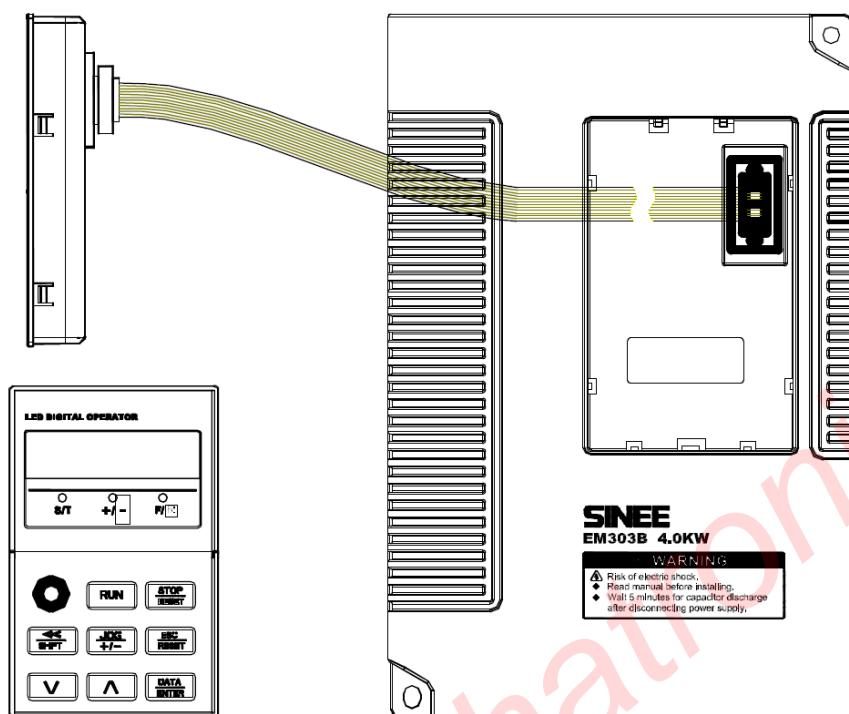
Disassemble the Keypad and Connect Extension Keypad Wire
